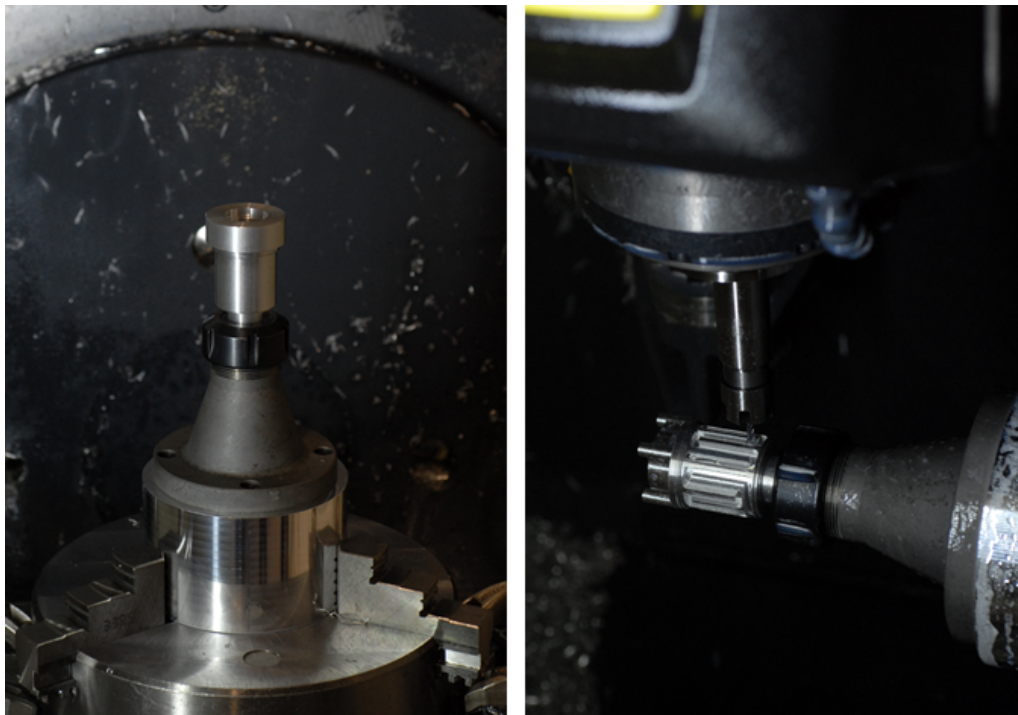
Milling of the moderator vessel's base body with helium cooling channels.
